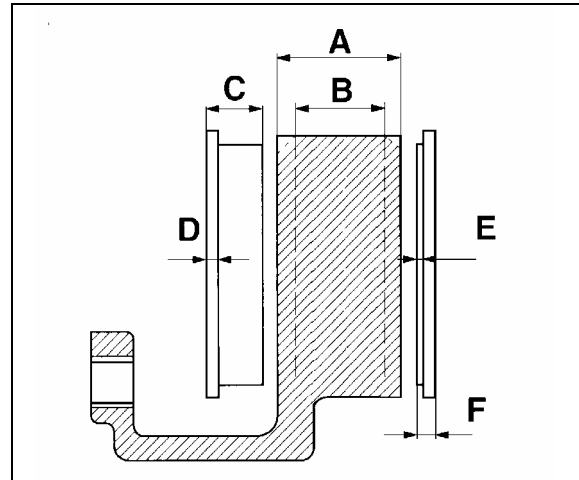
ROTOR AND PAD WEAR LIMITS
